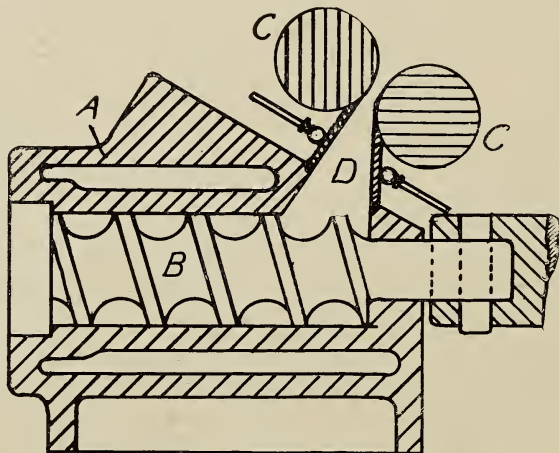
THE KAY TUBING MACHINE FEEDER.
